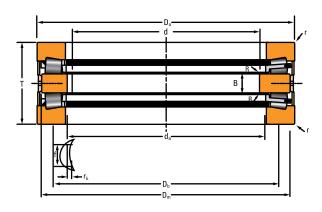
Type TTDFLK double-row thrust tapered roller bearing assembly.
